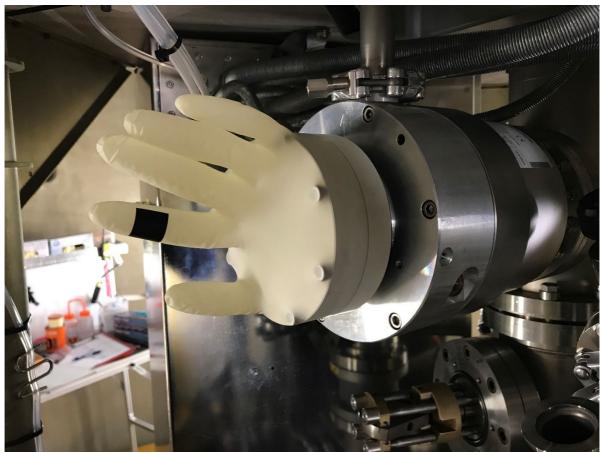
Leak testing of bearing covers using a Helium pressurised glove
